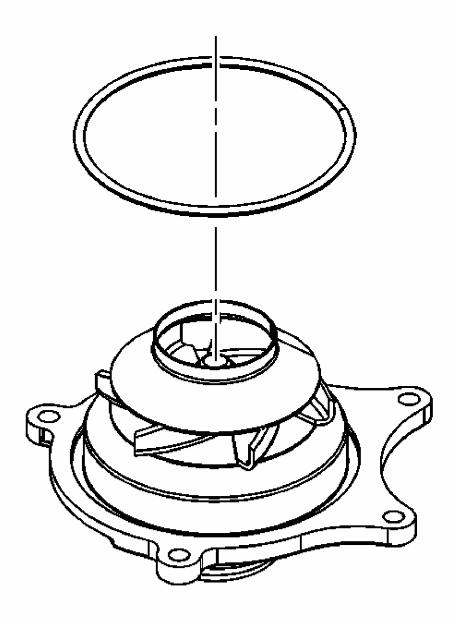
View Of Water Pump O-Ring Seal Courtesy of GENERAL MOTORS CORP.
